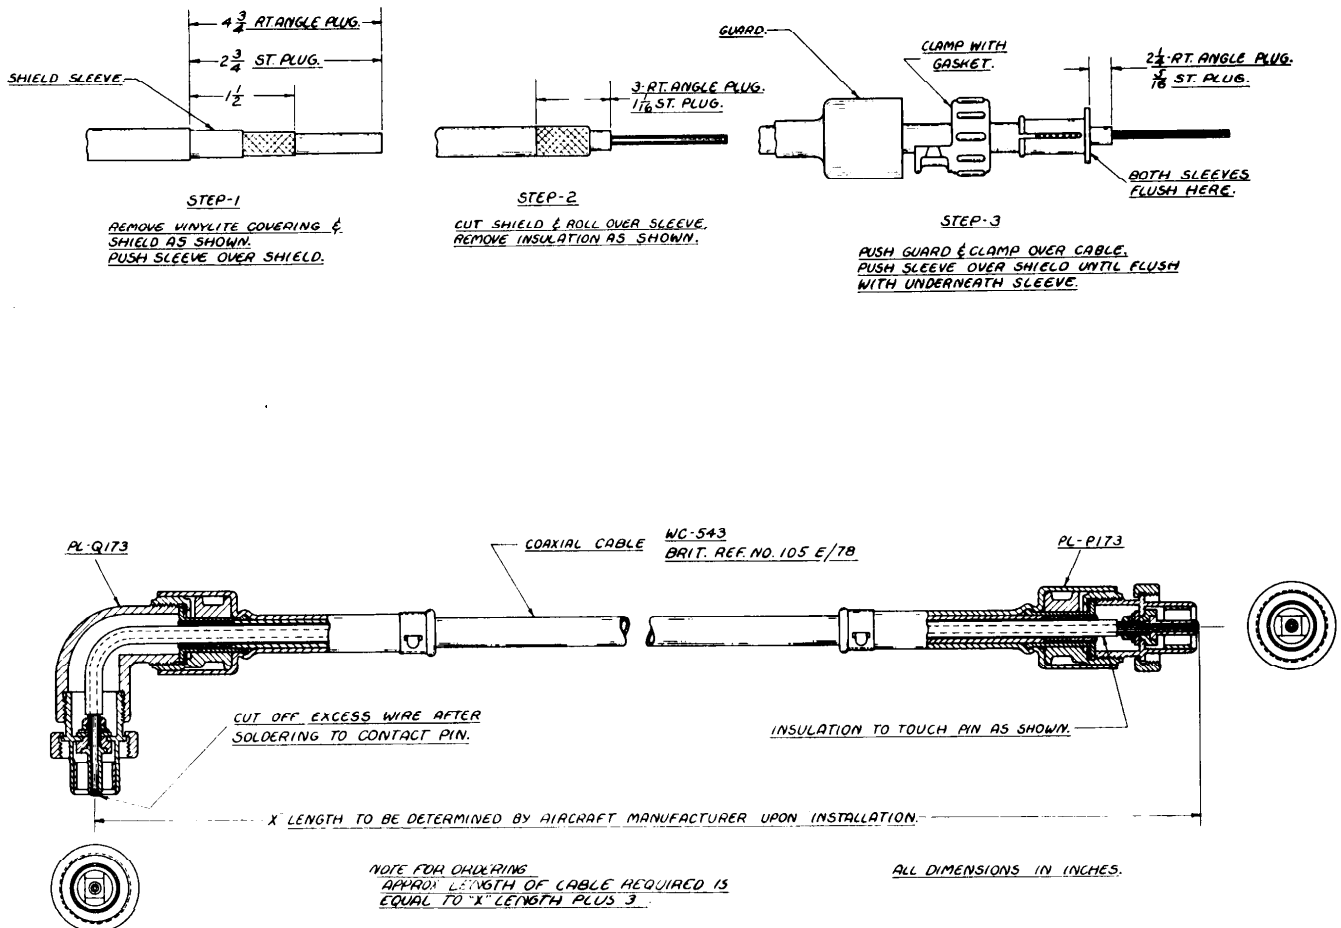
CABLE, RACK TO ANTENNA, ASSEMBLY DRAWING
